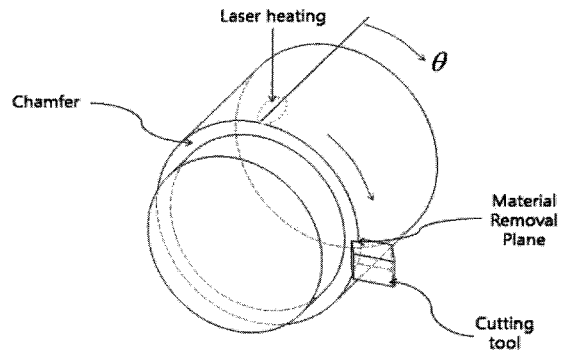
Laser-assisted machining of a cylindrical workpiece
